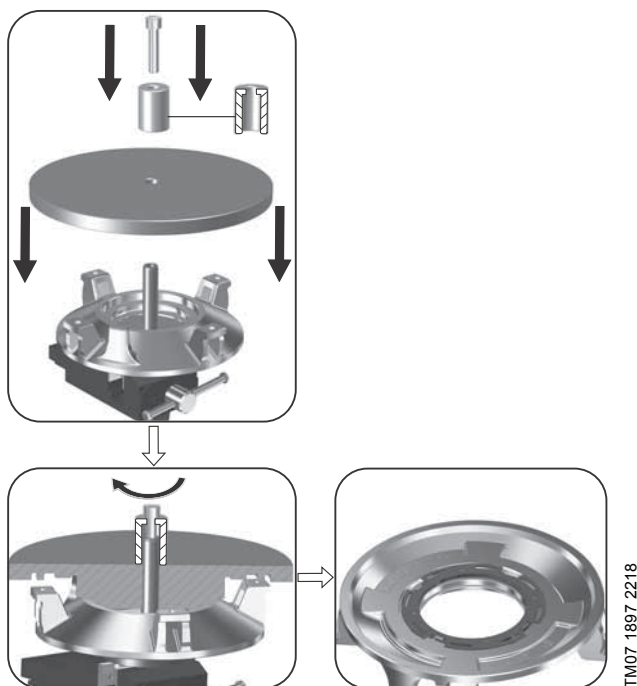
Neck ring, neck-ring retainer and inlet part positioned in service tool L
